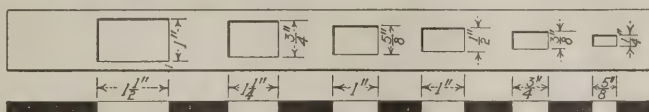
Sizing Gage Makes Work Easier and More Exact
